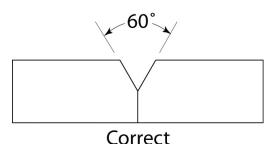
Establish a "V" notch at the joint for hot air welding.
